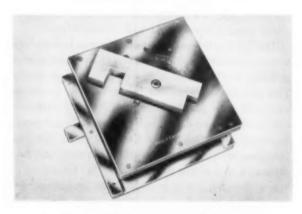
The most inexperienced operator can lap carbide tools rapidly and accurately with this fixture.
